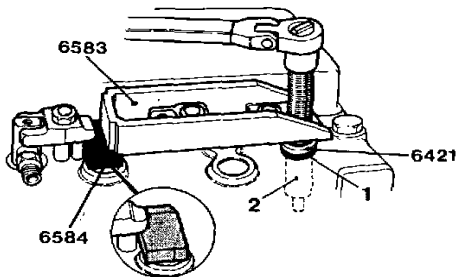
Fitting the copper sleeve and steel ring (60 series)
